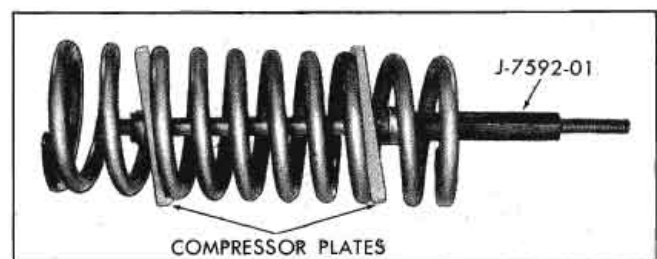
Compressor J-7592 Inserted in Front Coil Spring
